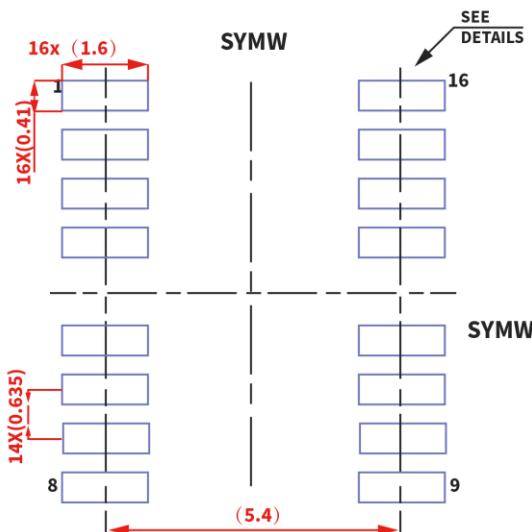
SOP16(300mil)/SOW16 Package Board Layout Example
